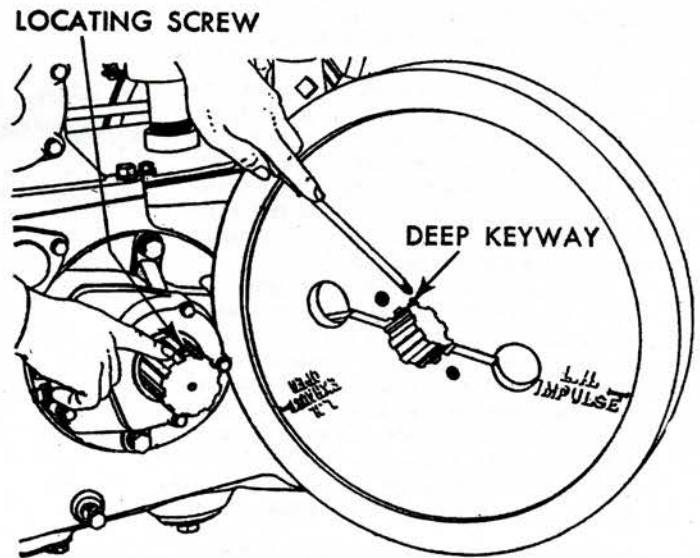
Locating flywheel with key over locating screw. Typical of all A, B, D, G, H series
